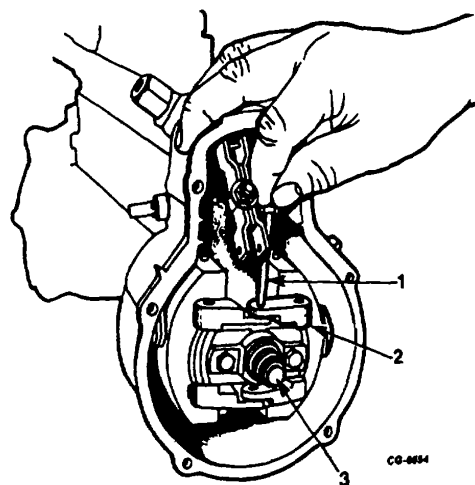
Removing Adjusting Pin from Flyweight Assembly
